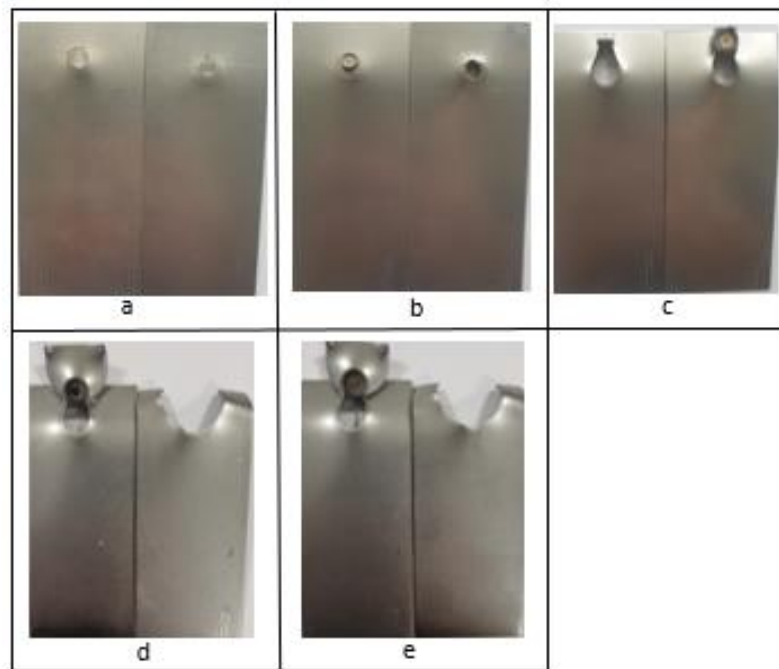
Fracture type of double pulse welding, a)7.2 kA b)8.4 kA c)9 kA d)10 kA e)11kA
